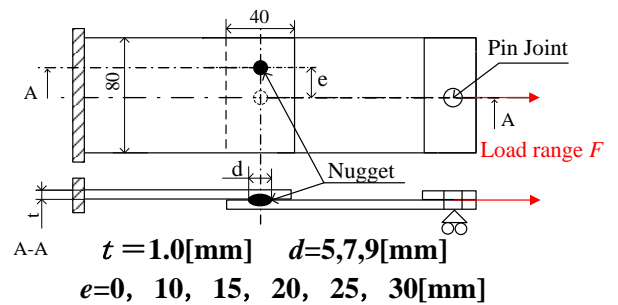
Spot-welded specimen under eccentric tensile shear
